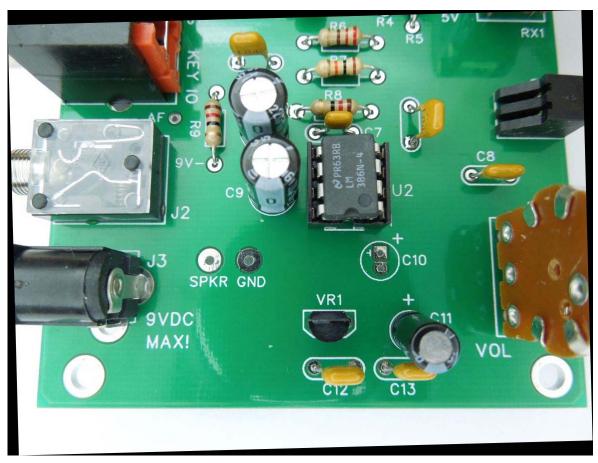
Assembled CPO Board Close Up, Bottom Half
